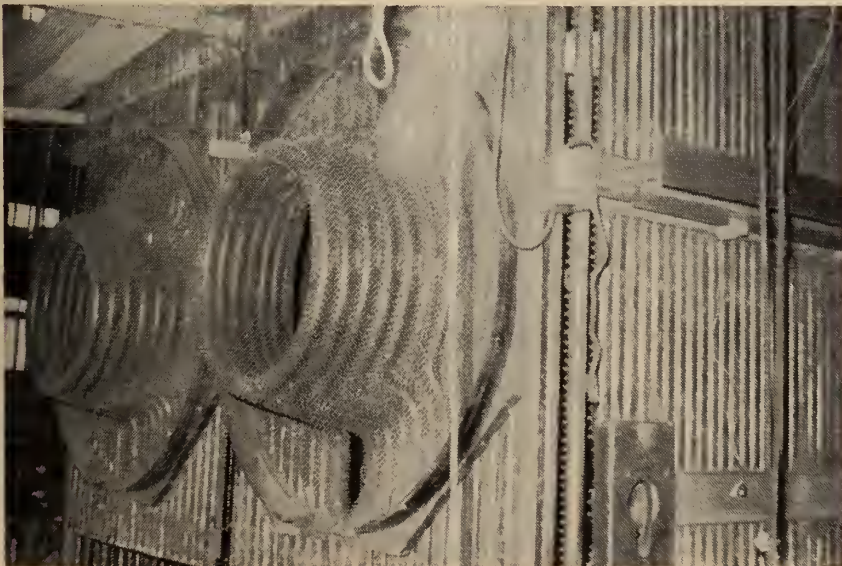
A view of Steam Drum showing stub tubes projecting.
